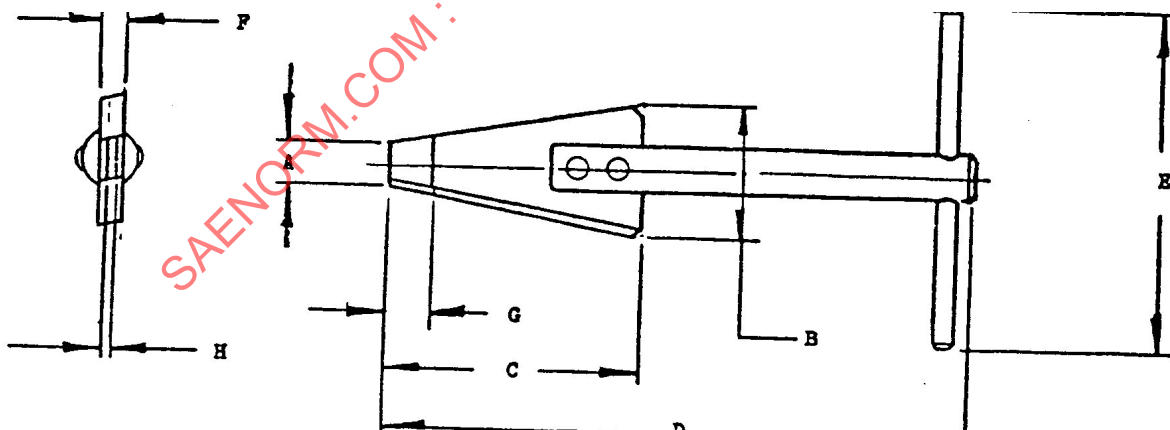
Type V, extracting tool for unified coarse and fine and spark plug thread series
